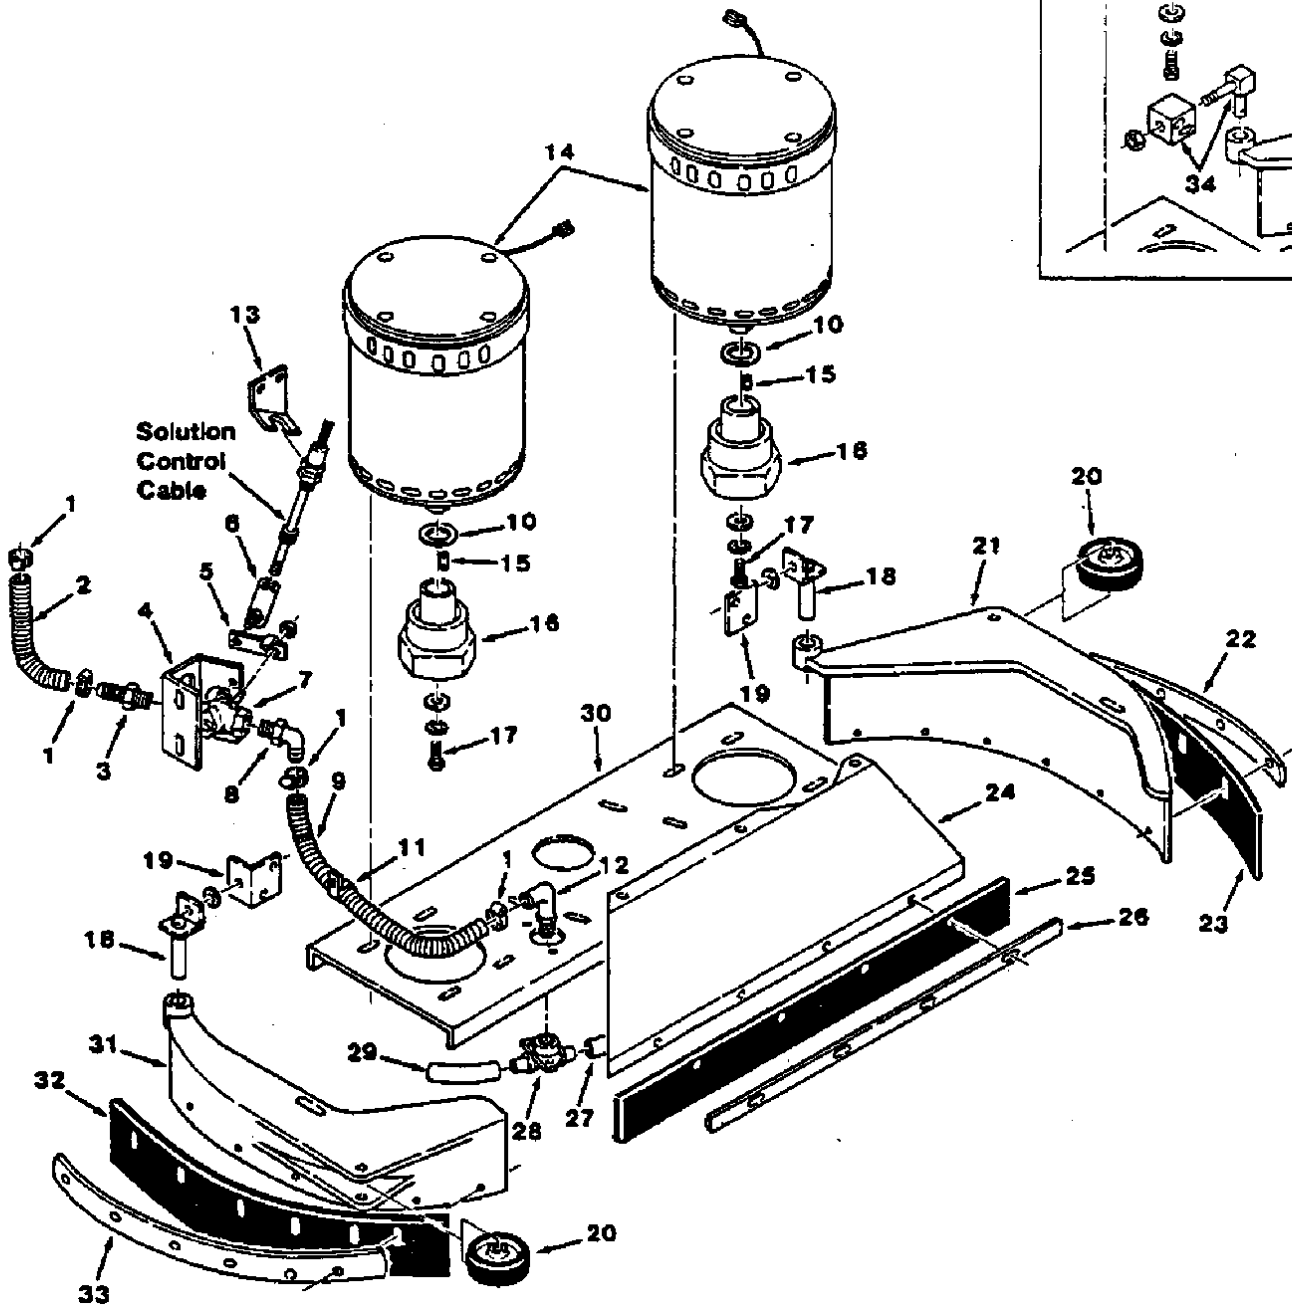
SCRUB BRUSH DRIVE GROUP
